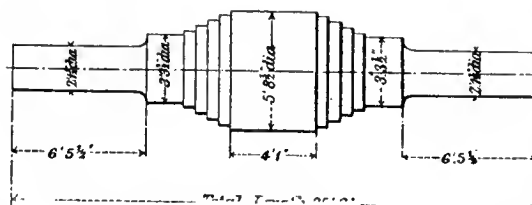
SOLID TURBINE SPINDLE FORGING.
